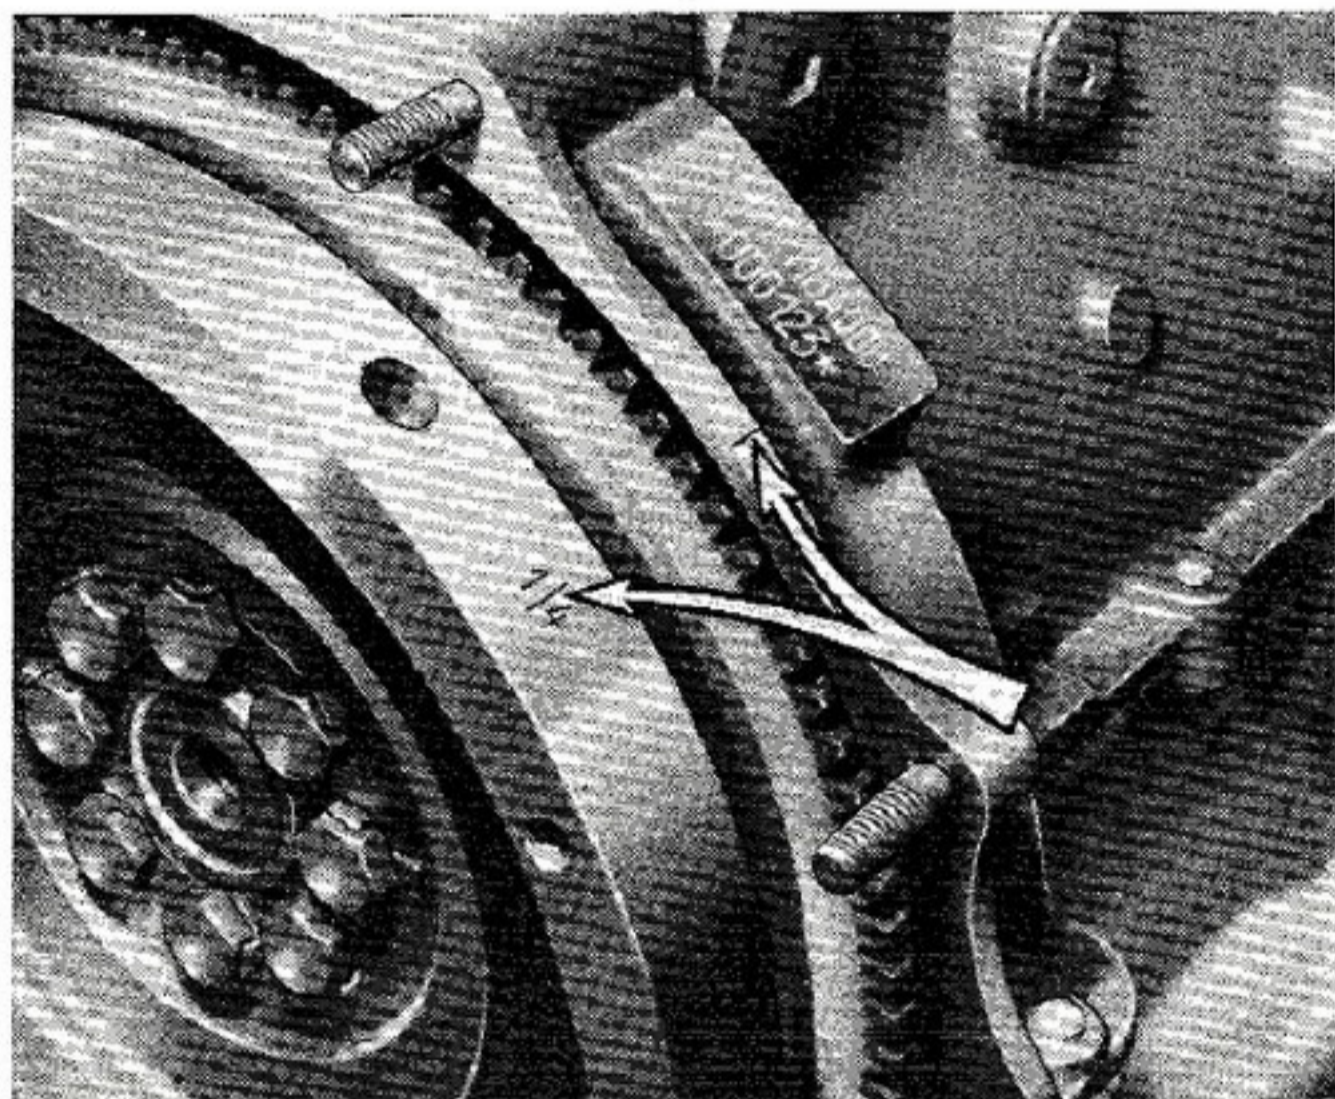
Reference marks on flywheel and crankcase for valve gear and ignition timing.
